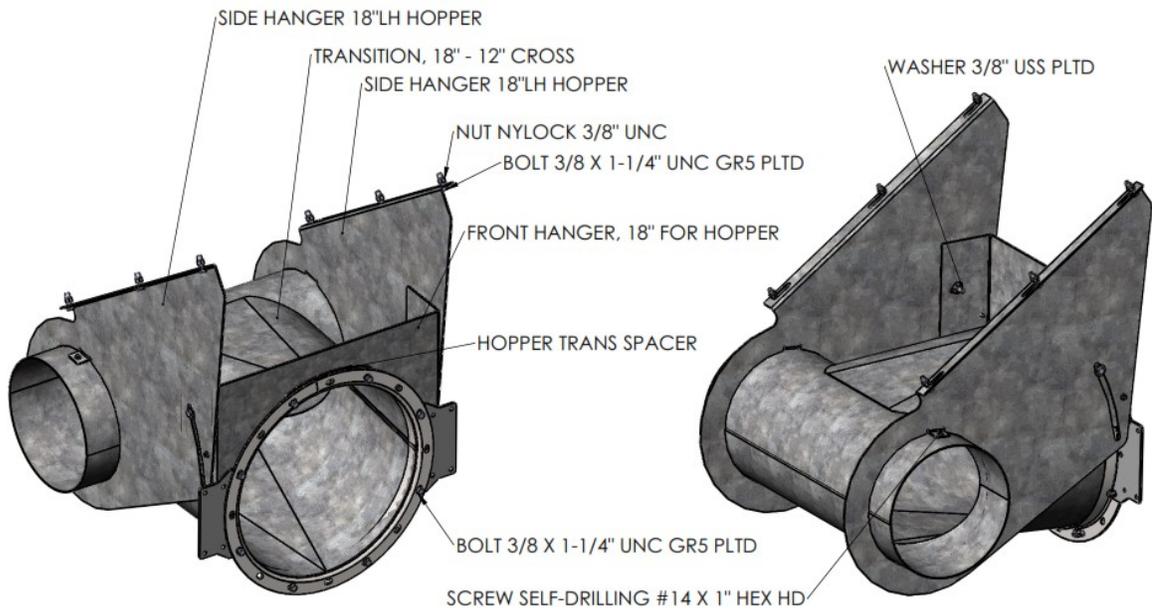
Hopper Transition Fan Mount Assembly
